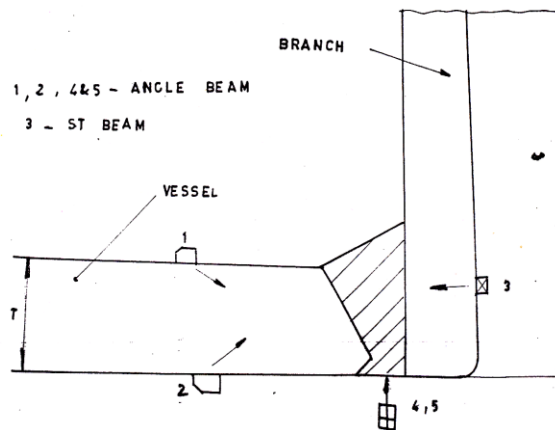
SCANNING DIRECTIONS FOR FULL PENETRATION CORNER WELDS (SET – THROUGH)
